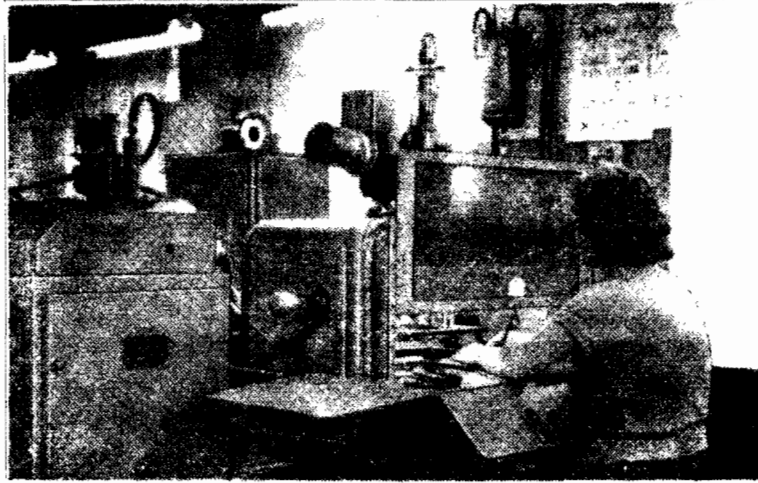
Shield for the operating electrodes of a device for welding plasticized resin parts with the front wall of the shield raised.
